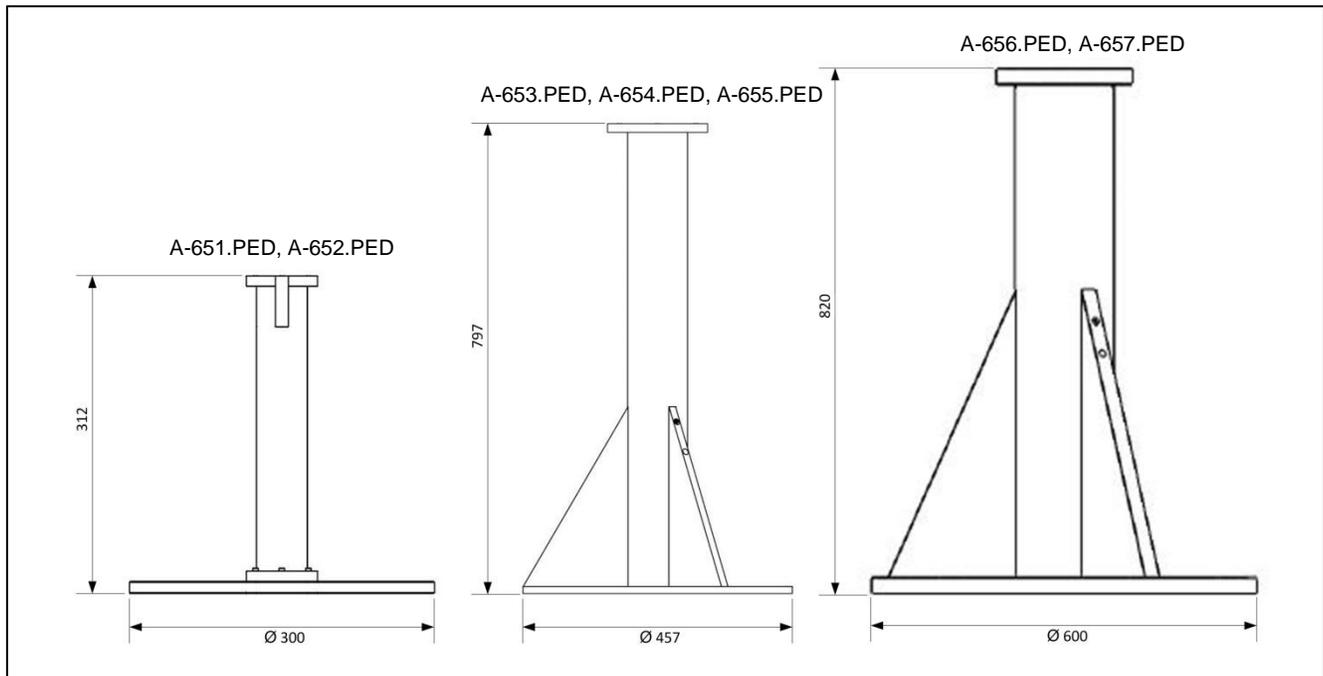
A-65X.PED Pedestal Dimensions (mm)
